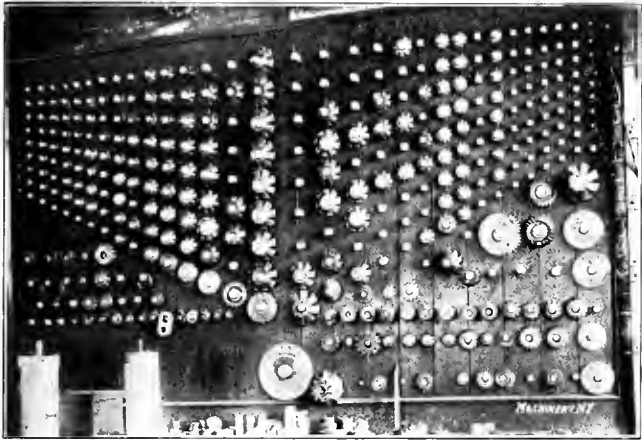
Gear and Milling Cutter Rack in the Tool-room
